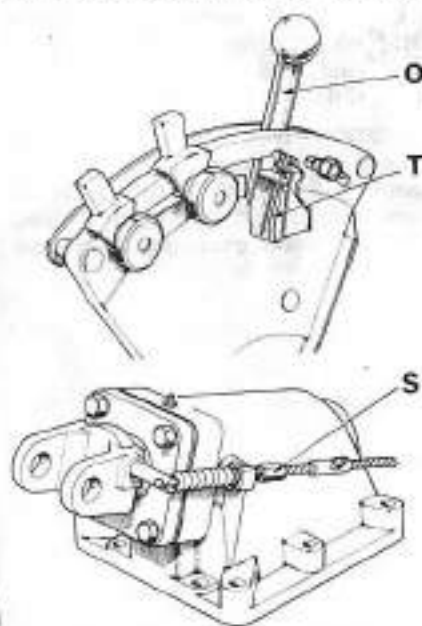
Adjusting points for top link sensing unit flexible cable; refer to text for procedure.
